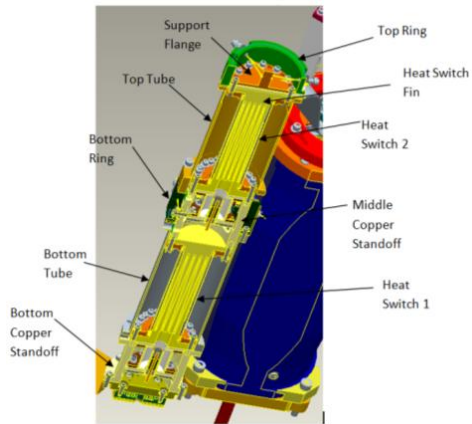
Heat Switch 1 and 2 stack up Cross Section
